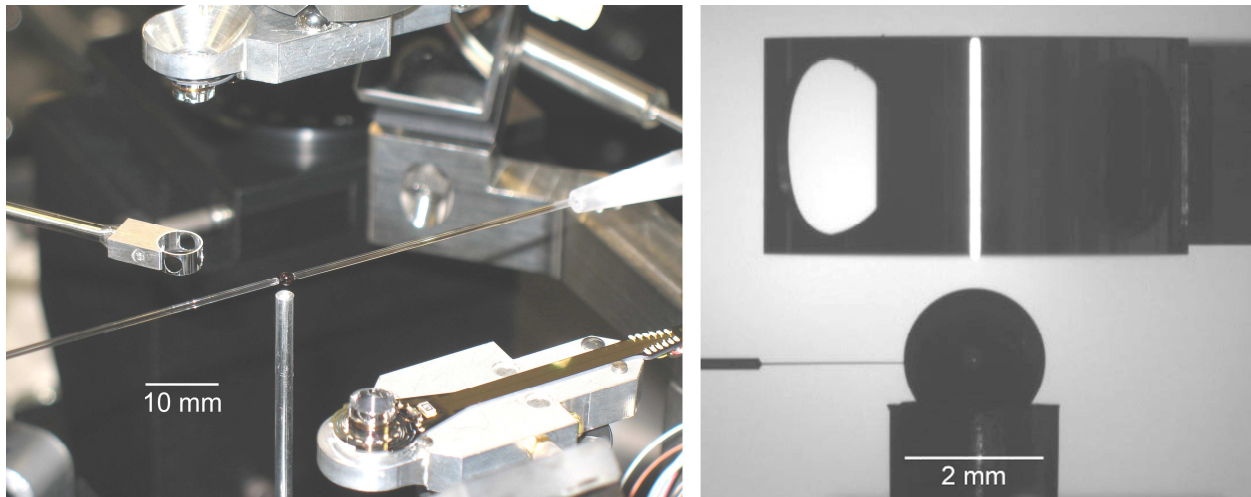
(left) Target components mounted to the vacuum tooling on the Precision Robotic Assembly Machine in preparation for assembly. (right) Image from the OCMM vision system showing the capsule-fill-tube assembly ready to be raised into the diagnostic band.
